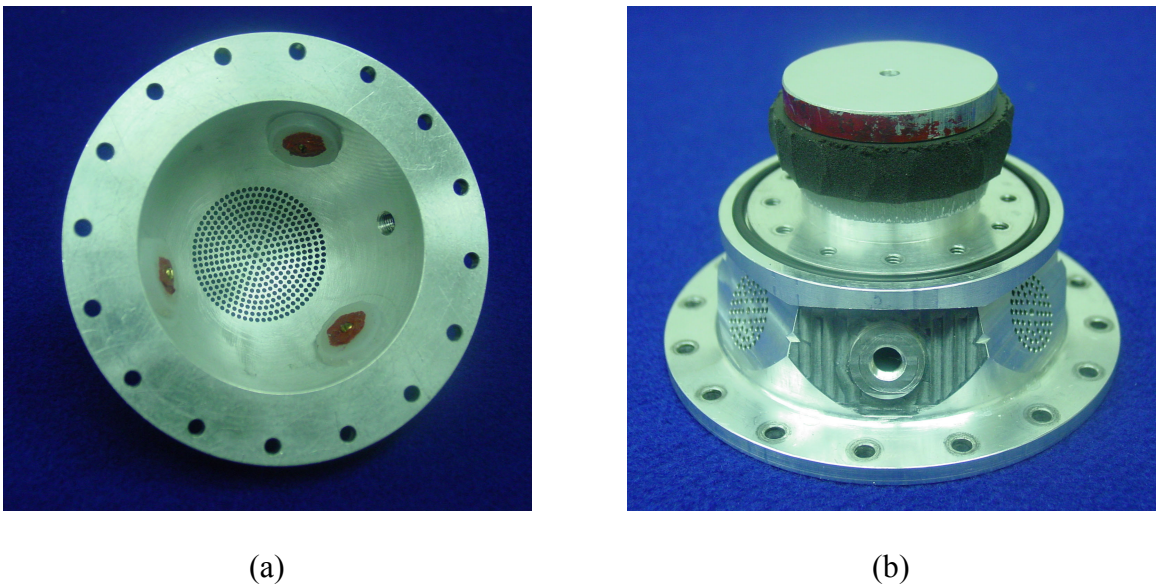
Fabricated Pump Chamber With Integrated Check Valves, Inside (a) and Outside (b).
